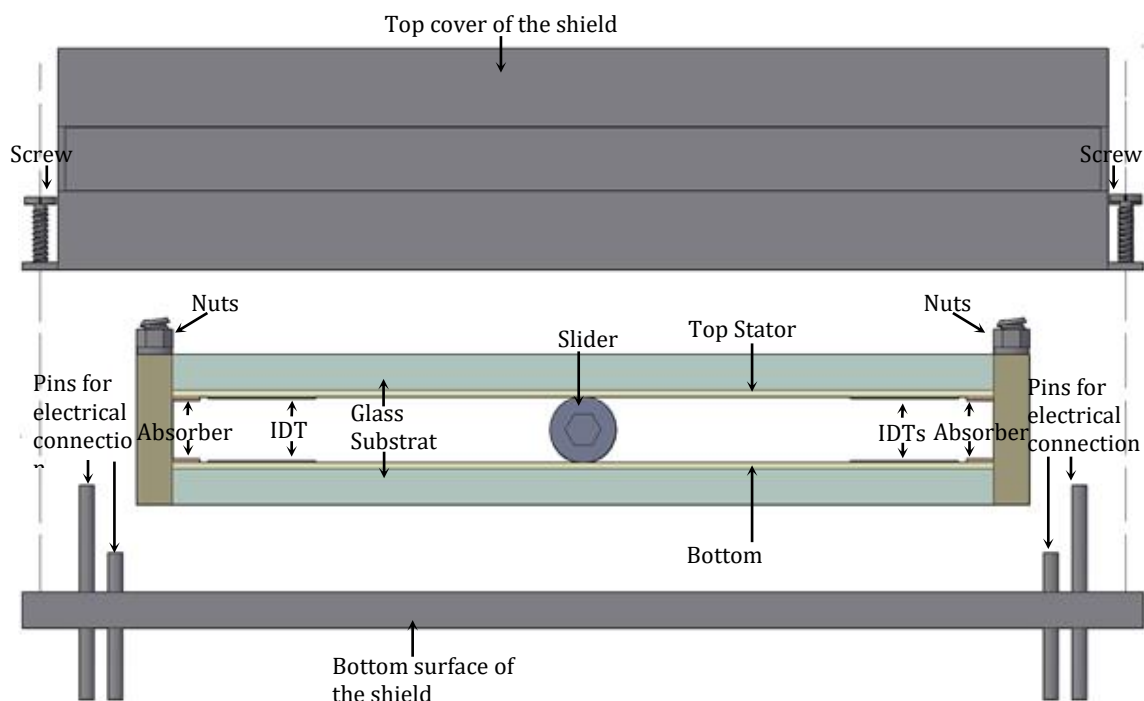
Front view of the SAW motor with a cylindrical shaft.
